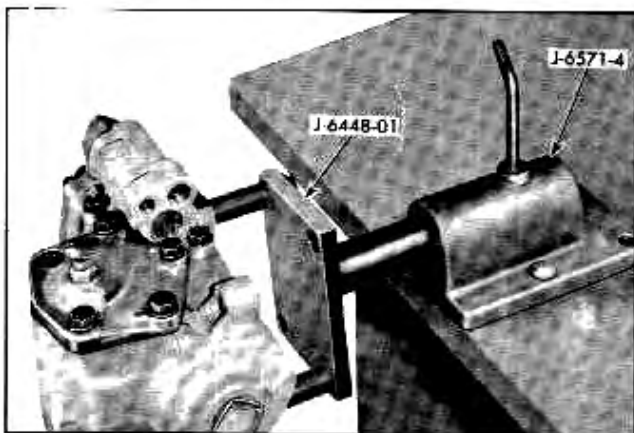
Steering Gear Mounted on Tool J-6448-01
